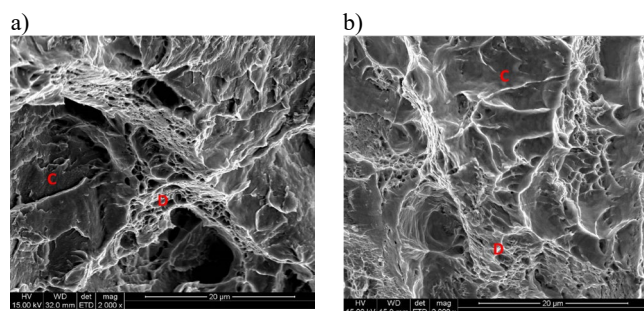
a, b. Fractography images of the specimen rupture surface, subjected to uniaxial tensile tests: (a) specimen 21P-1 and (b) specimen 31P-2; D – ductile-cavity fracture and C – brittle-cleavage fracture
